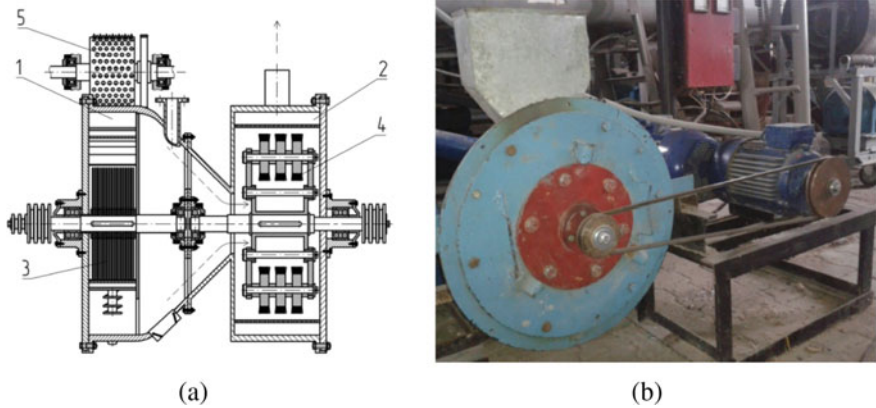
Scheme (a) and experimental setup (b) RCA CD: 1, 2—grinding chambers, 3—disc cutters; 4—needle milling working bodies; 5—studded rolls
